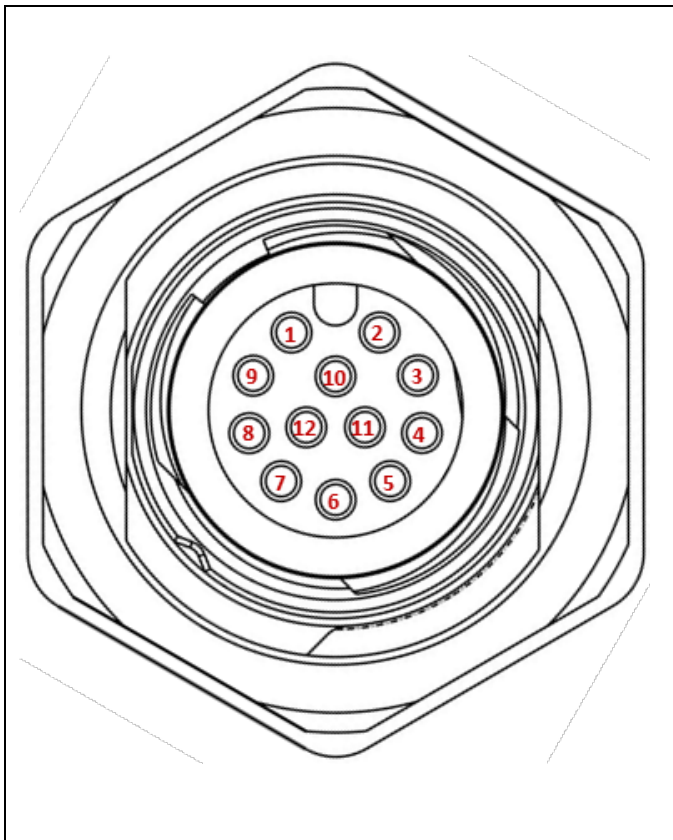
IO ports, pin assignment of M12 connector (IEC 61076-2-101)
